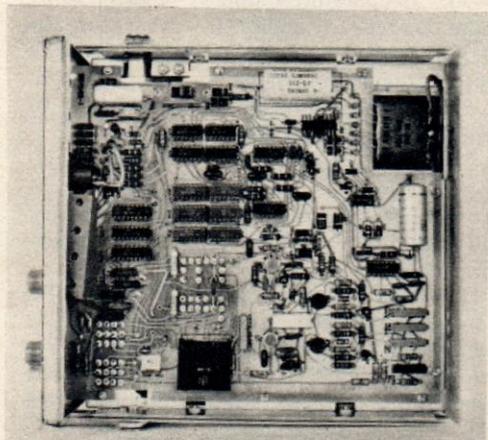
Top view of IM-102 shows majority of components are mounted to printed-circuit. Note in lower left corner empty holes on board.
